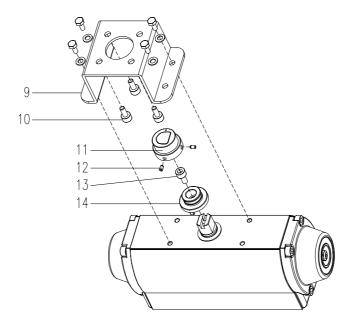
Rotary Magnet Kit and Mounting Bracket Kit with Numbered Components
